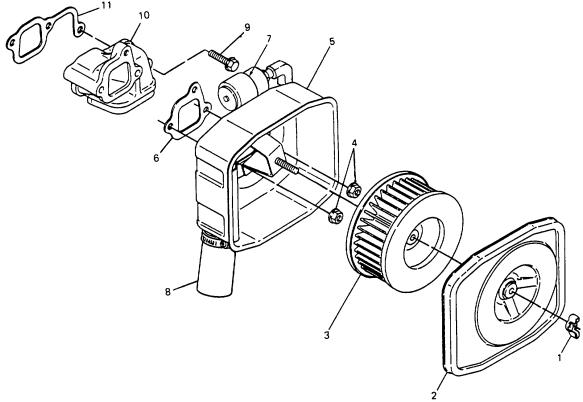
Air Cleaner Assembly and Air Intake Bend
